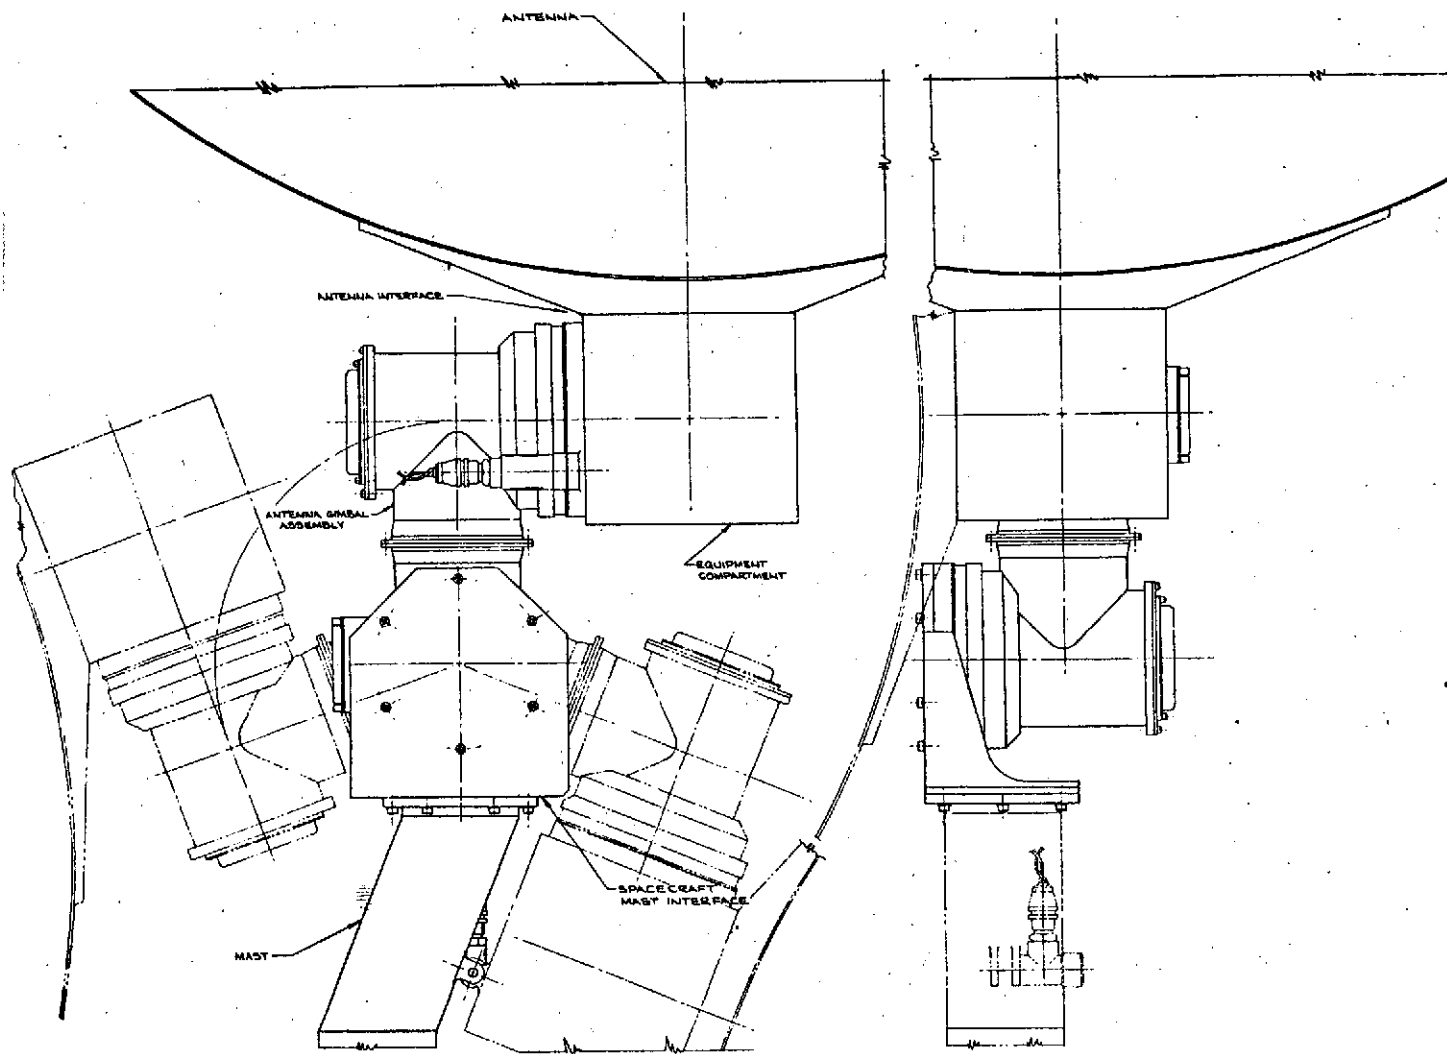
Antenna Gimbal Assembly Configuration (Mounted)
